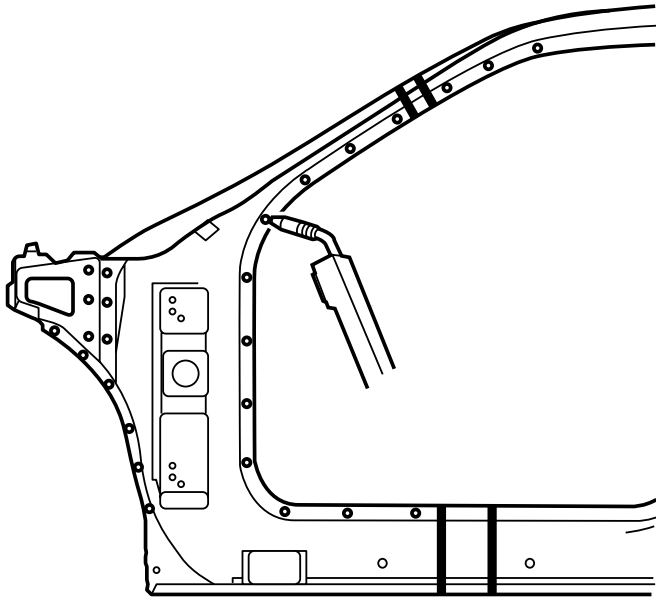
Plug Weld and Stitch Weld
